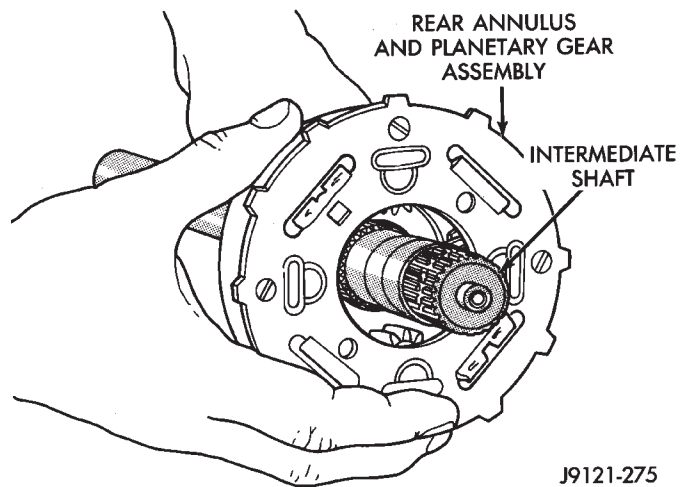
Installing Assembled Rear Annulus And Planetary Gear On Intermediate Shaft
